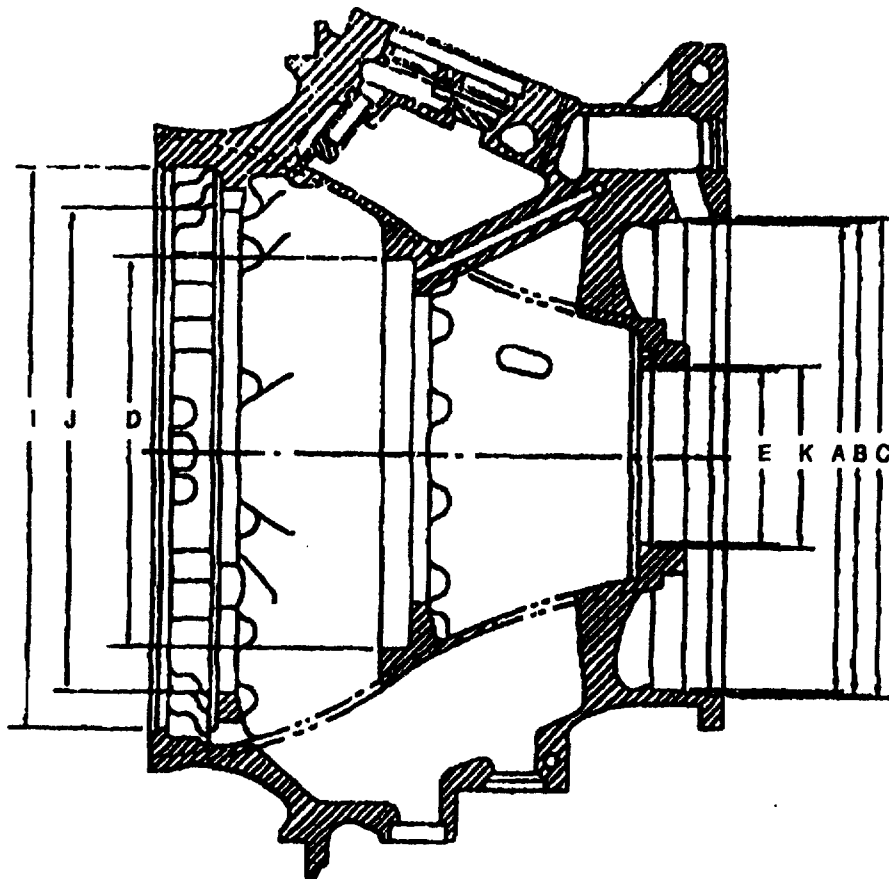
Repair of Inlet Housing Mounting Pad Holes.
